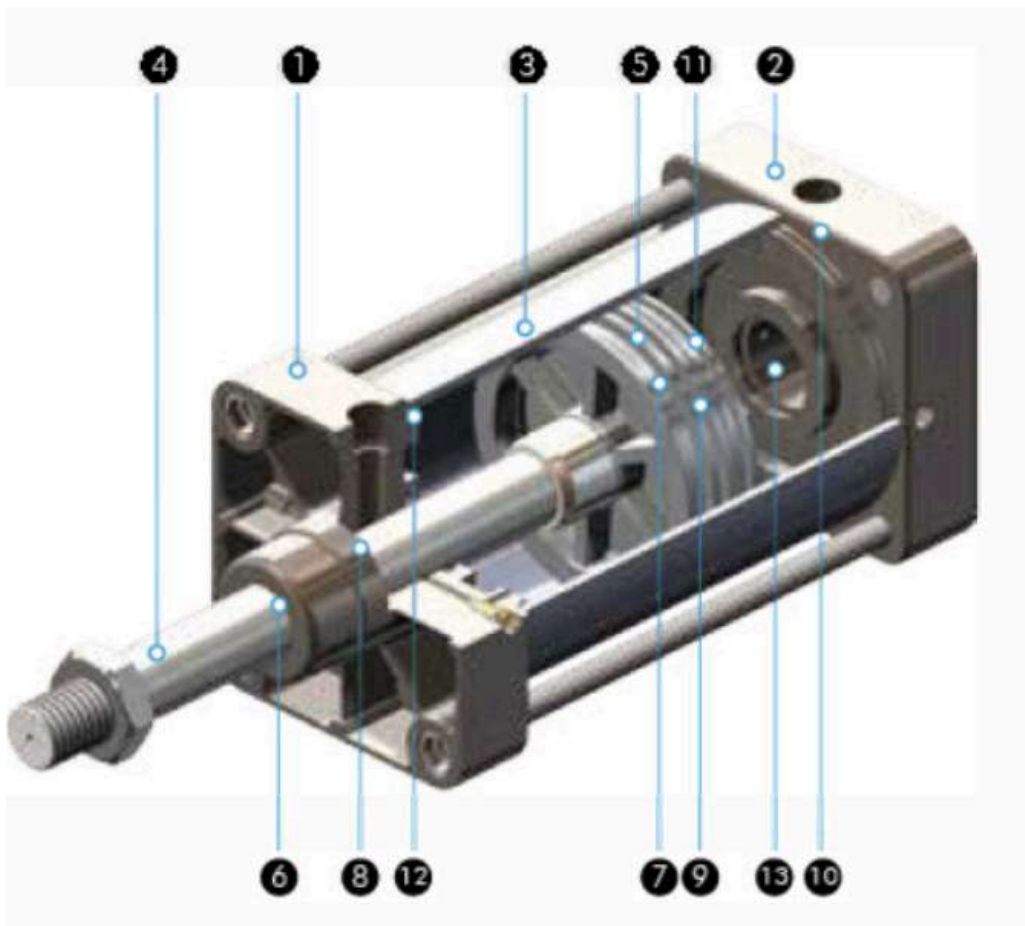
Ø80 to Ø250 cylinder assembly, item numbers as tabled above.
